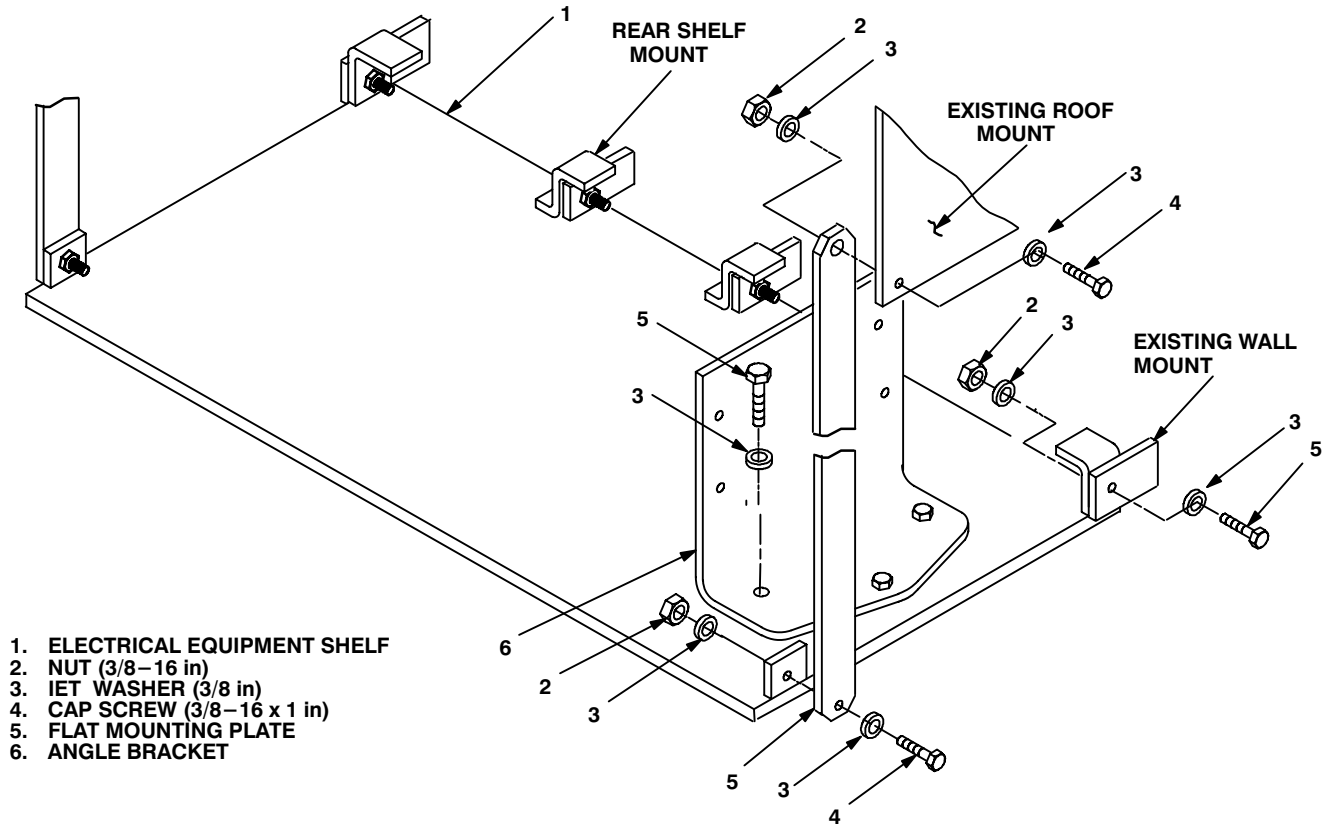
Electrical Equipment Shelf Assembly and Installation
